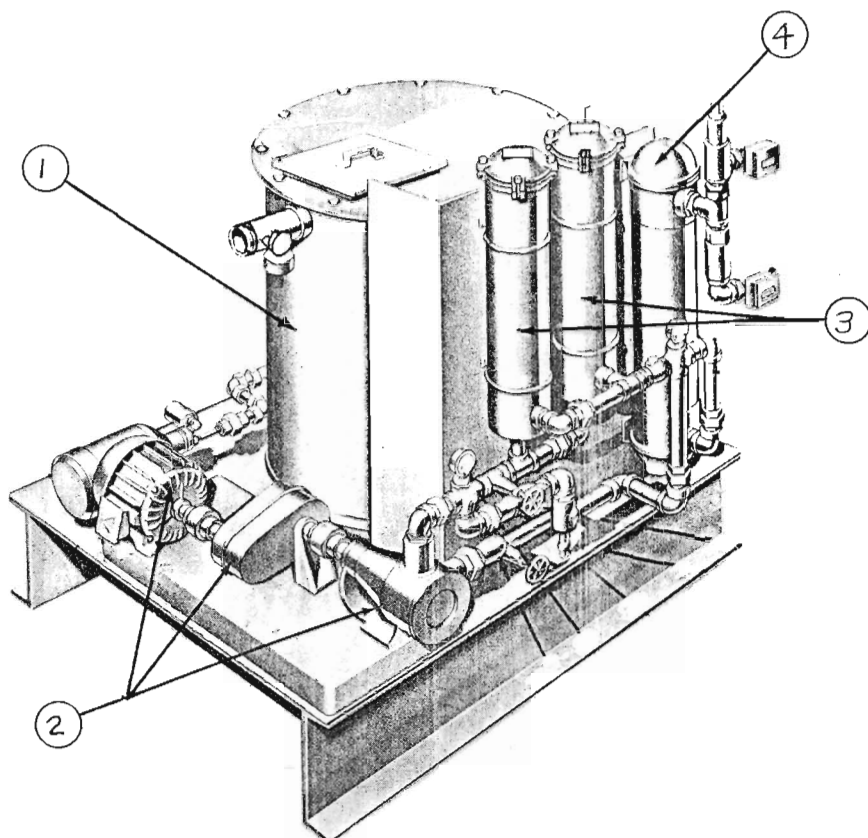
External lubrication system (courtesy of *Allis-Chalmers*). Legend: (1) storage tank, (2) motor-driven gear pump, (3) pressure filter, (4) water-to-oil cooler.
